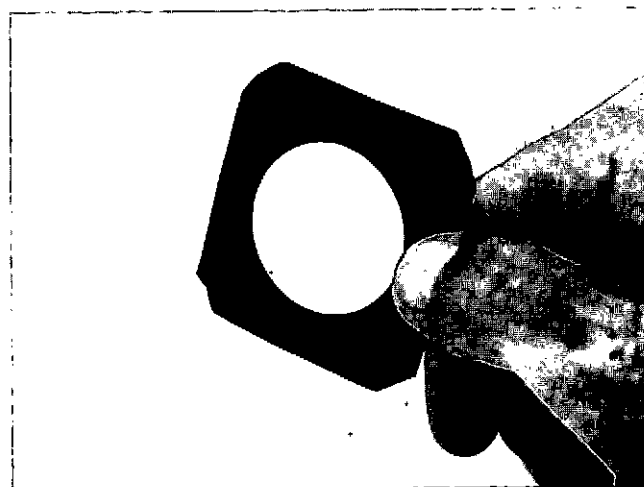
, (T465077). Fold down the edges of the turbocharger bearing insert
